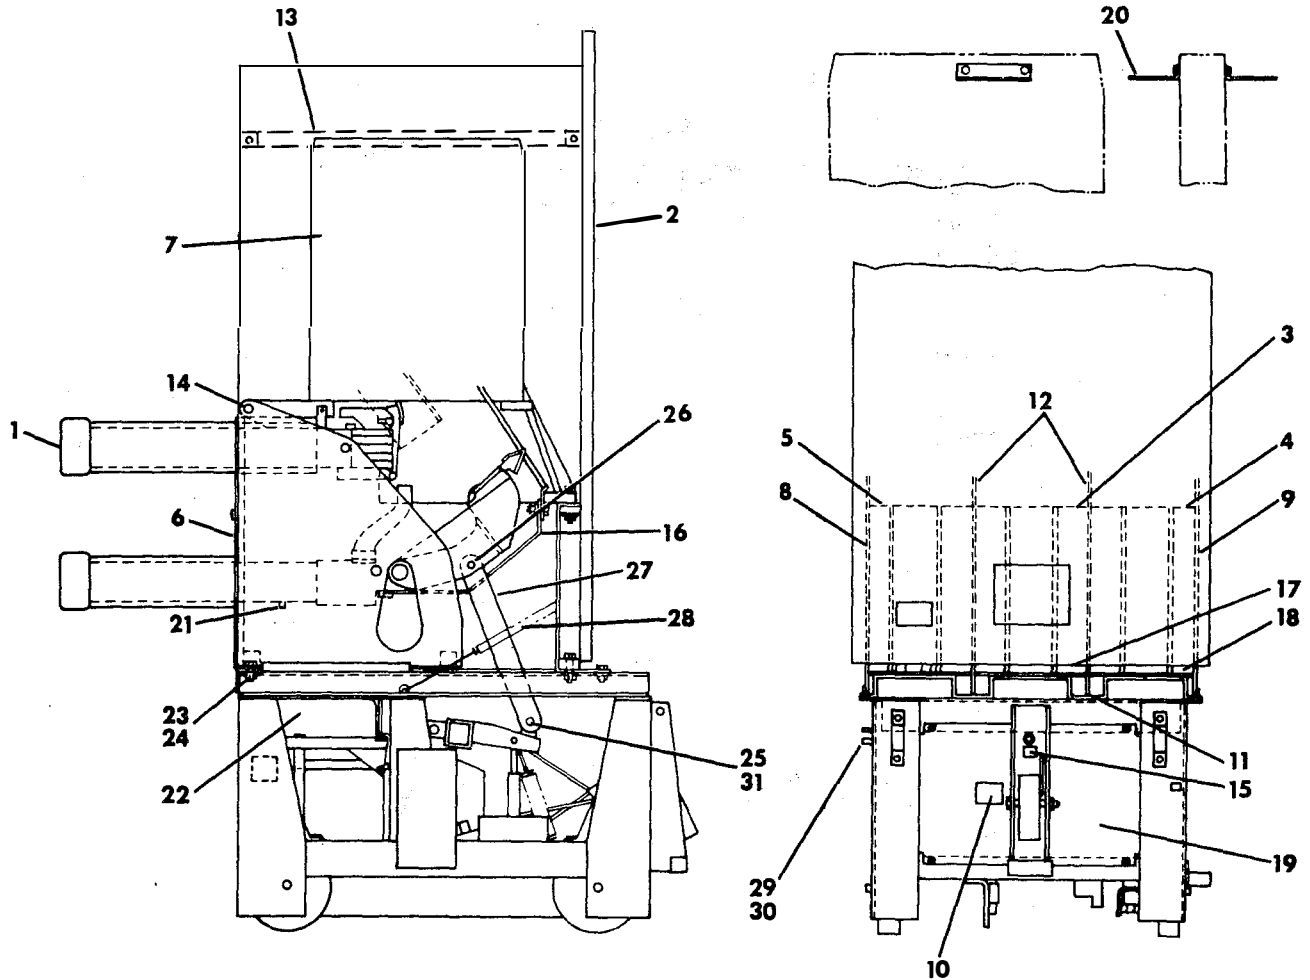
Solenoid Operated Breaker Assembly (72-422-909-601)
